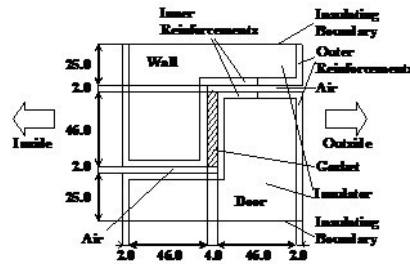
Cross-sectional view of the region where an insulating wall is connected with an insulating door. Unit: mm
